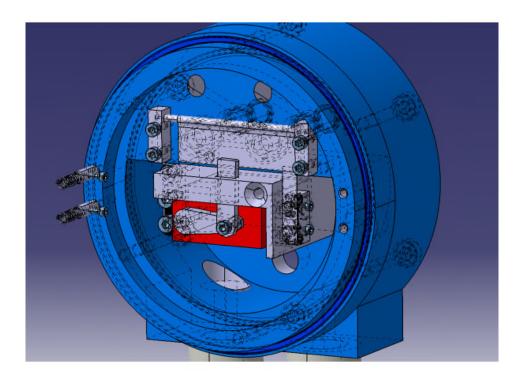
Front Cover and Flange Rear View showing Inner Details
